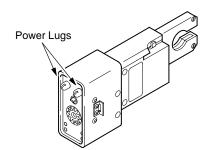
Cleaning the Weld Head Power Lugs
